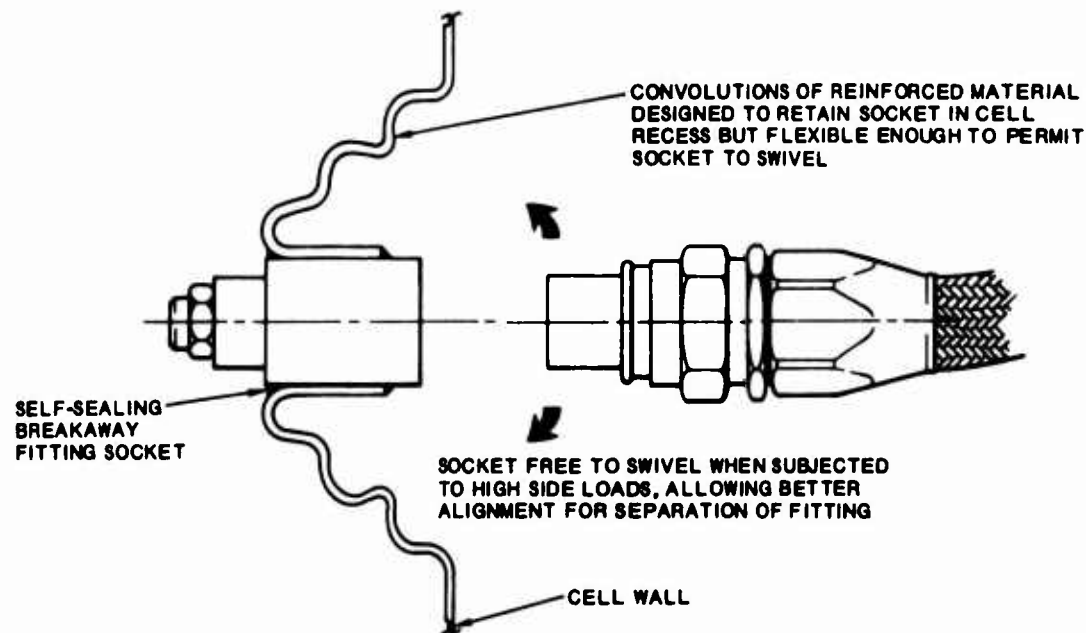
Recessed Swivel Mounting for Breakaway Fitting.
